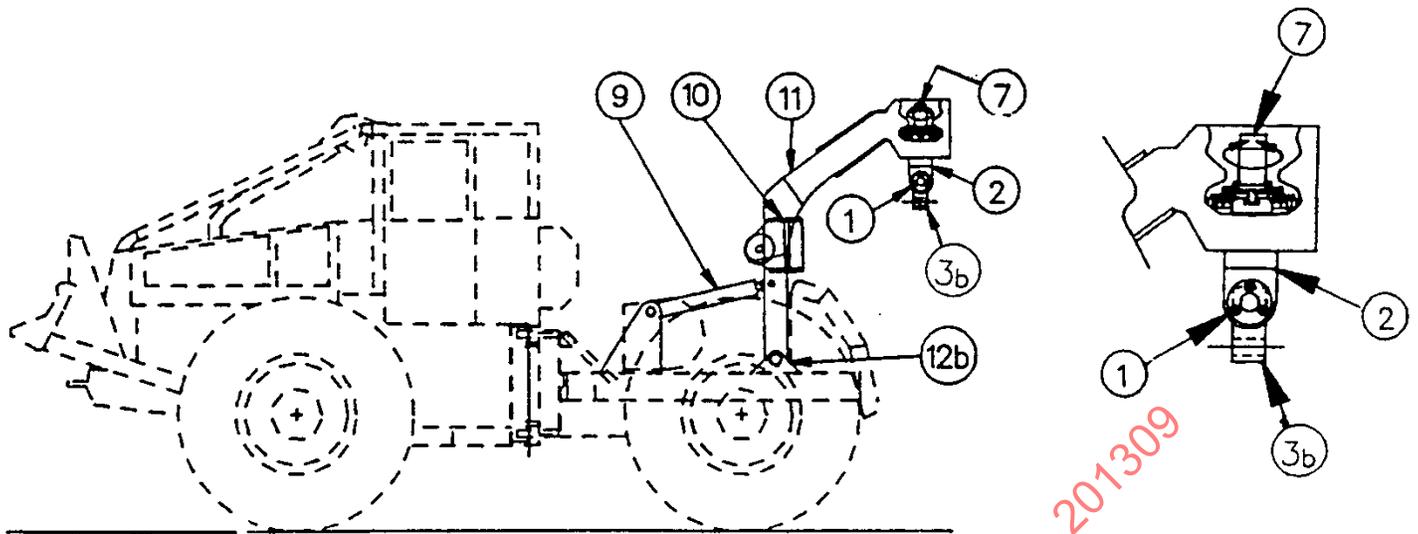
SINGLE FUNCTION BOOM ASSEMBLY—FRAME MOUNTED
